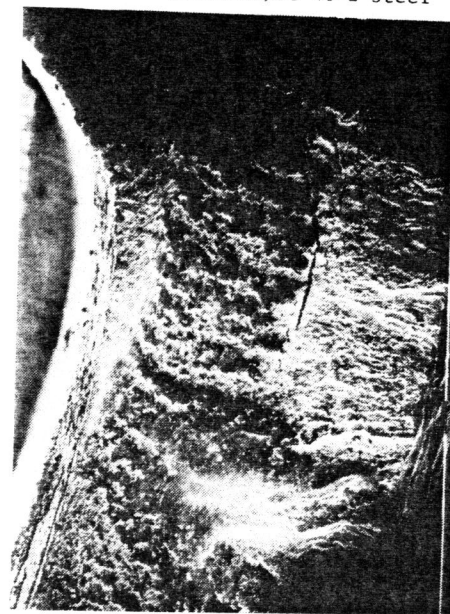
Fracture surface showing crack initiation in the top left of a square tube (35x Magnification)
